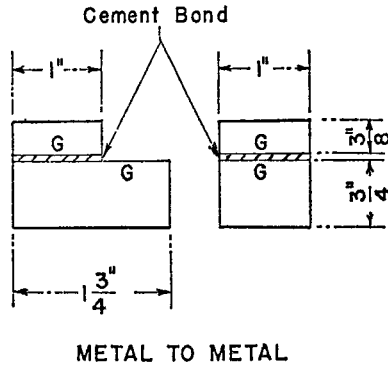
A.—Specimen arrangement for impact strength test (metal-to-metal).
